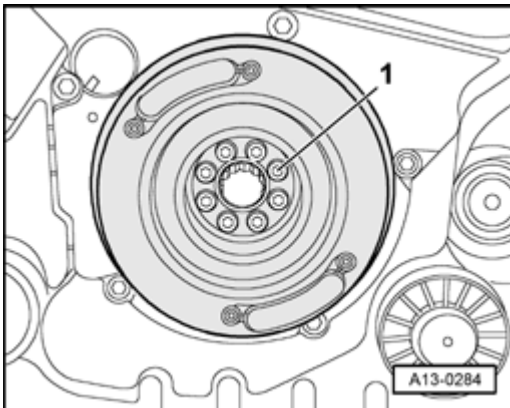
Removing Vibration Damper Of Crankshaft After Removing 8 Attachment Bolts
